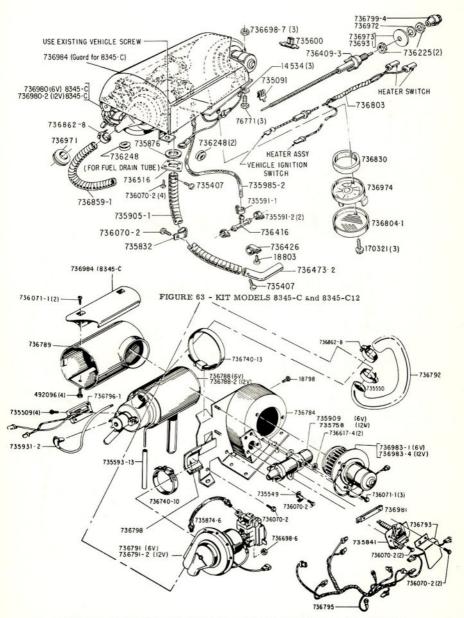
HEATER ASSEMBLY 736980 and 736980-2 Used On 8345-C & 8345-C12
